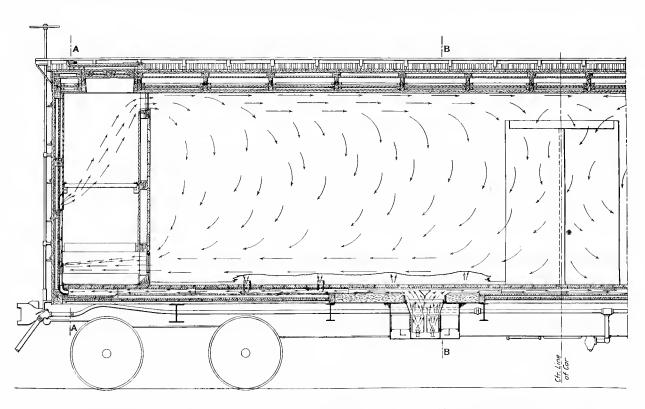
Section Through Refrigerator Car Equipped with the Alcohol Heating & Lighting Company's Heating System, Showing Location of Heater and Passages, and Flow of Air Currents. See also Fig. 118.
